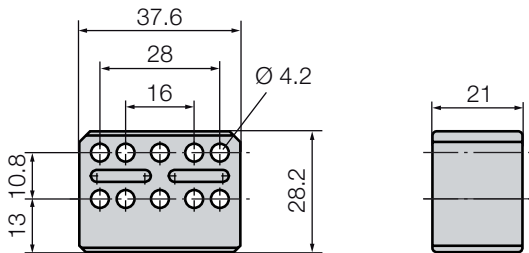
Installation dimensions of BTL6-A-3800-2 magnet
